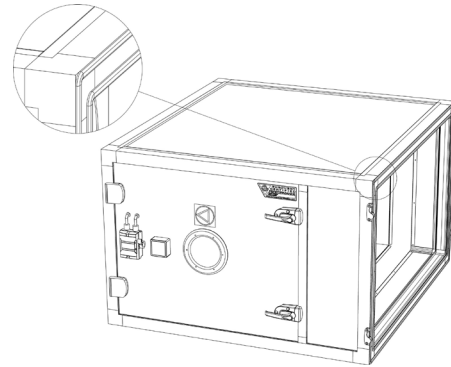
Sealing strip on single deck AmberAir section.
